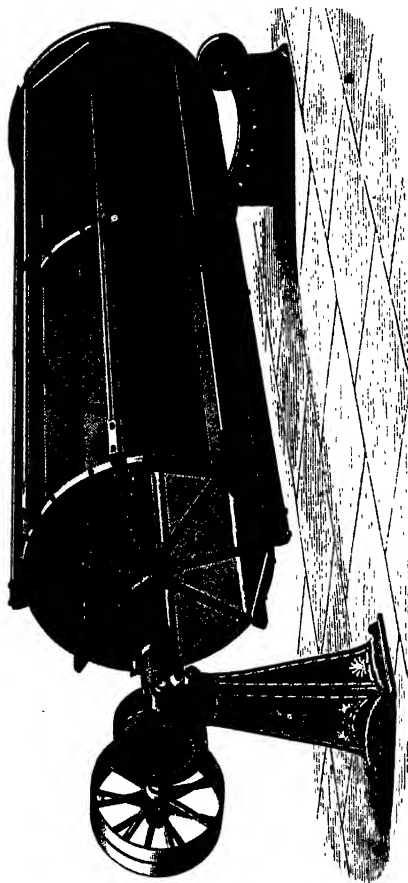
Rotary Self-cleaning Tea Sifting Machine (perspective view).
